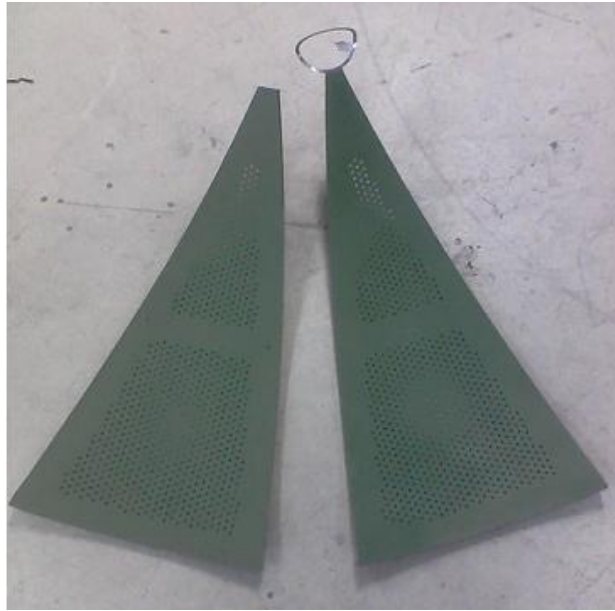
a panel with ring (right) and then the panel after ring was removed (left)
